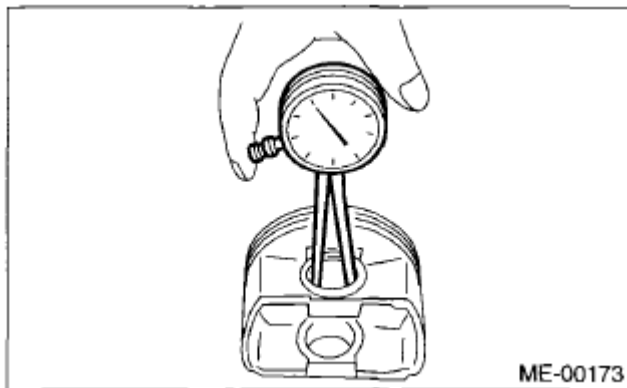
Checking Clearance Between Piston Pin And Hole In Piston
